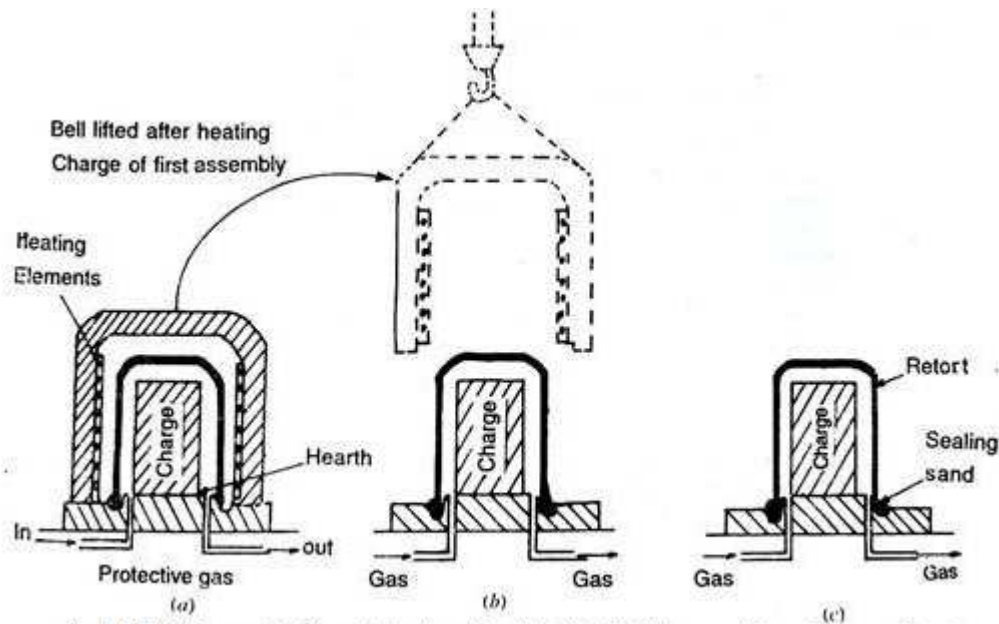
Bell Furnace (a) Charge being heated by the bell, (b) Bell in removed from first assembly and being put on second assembly, (c) Third assembly ready.
